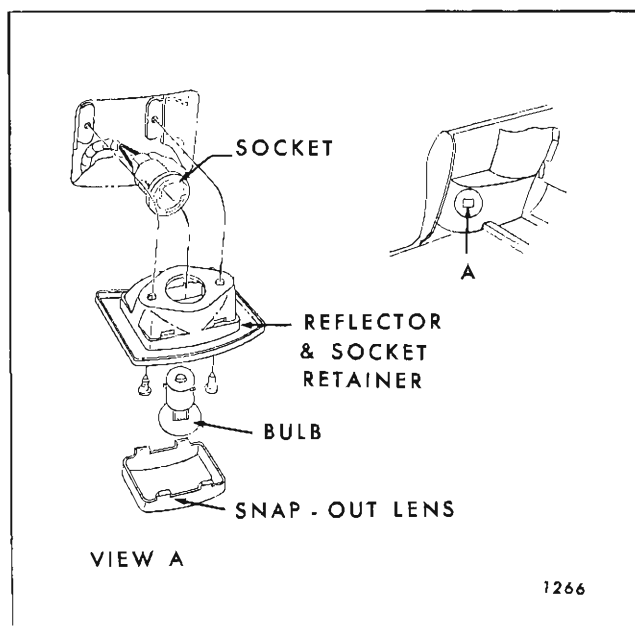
E3—Rear Quarter Arm Rest Lamp Assembly
